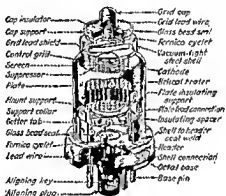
Cutaway drawing of the 6J7, all-metal, screen-grid pentode, showing component parts. (RCA.)
